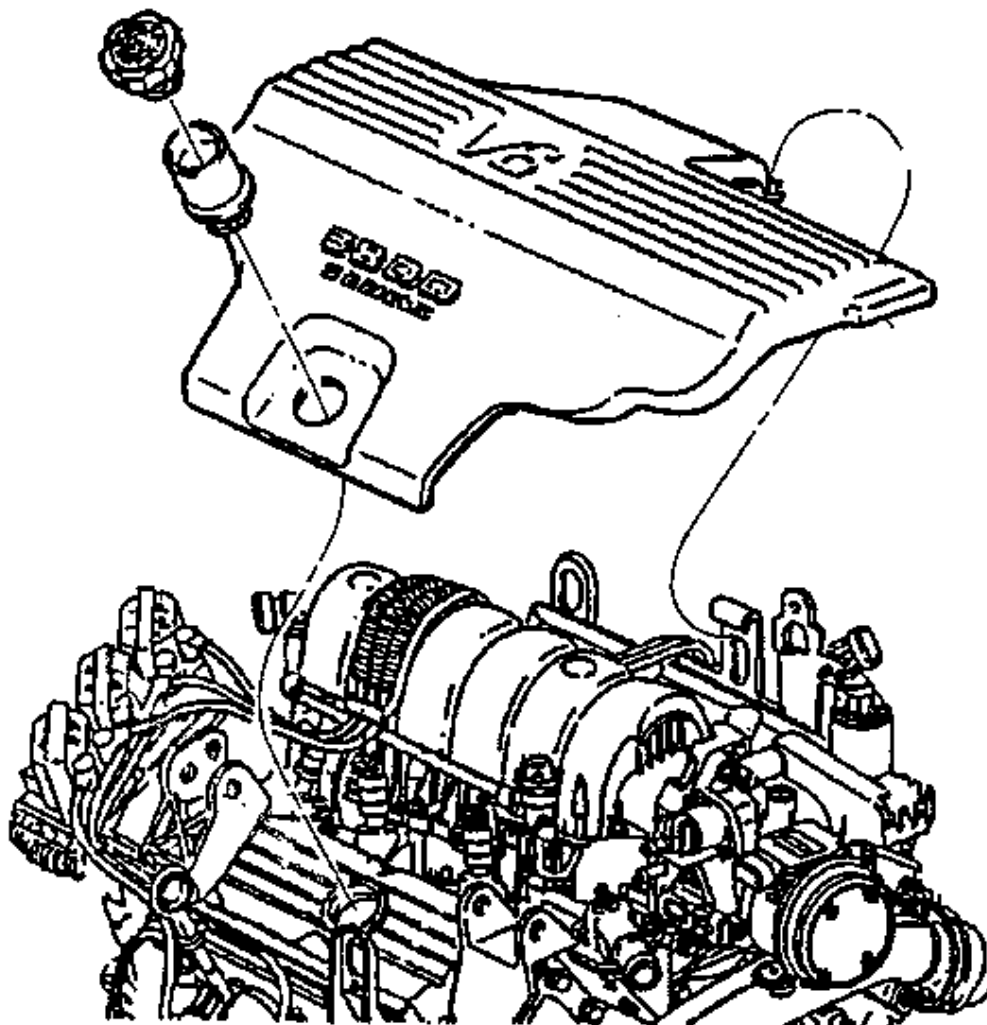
View of Fuel Injector Sight Shield & Oil Filler Neck
